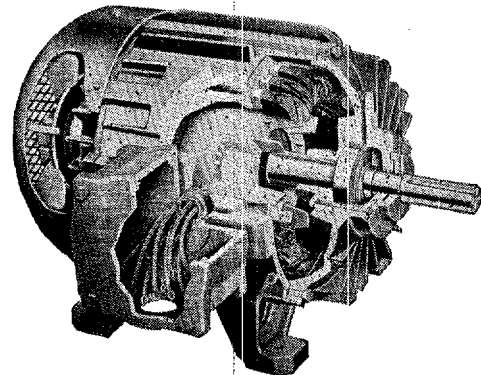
Explosion-proof construction is modification of totally-enclosed fan-cooled design.
